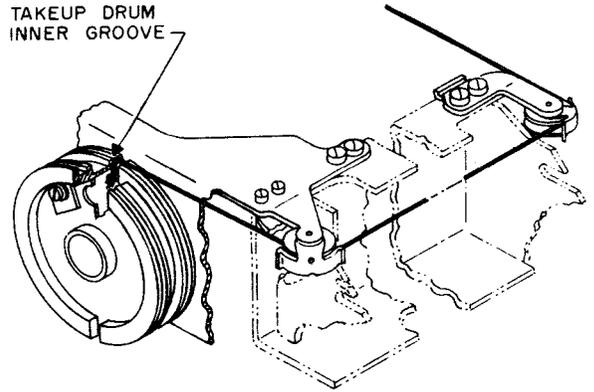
Return Cable Installation, Cable Threading Diagram
